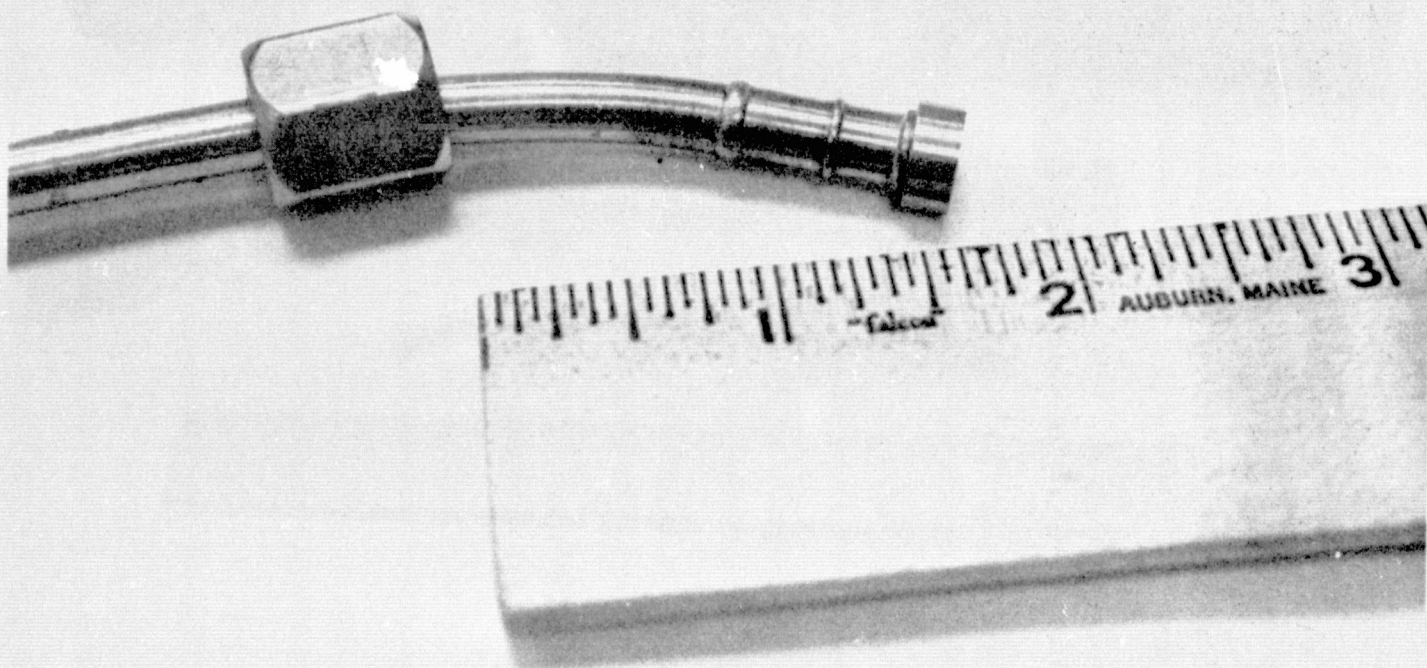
Close-up View of the Weld in 1/4 Inch Size Tubing
